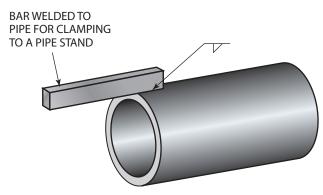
Holding the pipe in place by welding a piece of flat stock to the pipe and then clamping the flat stock to a pipe stand.
